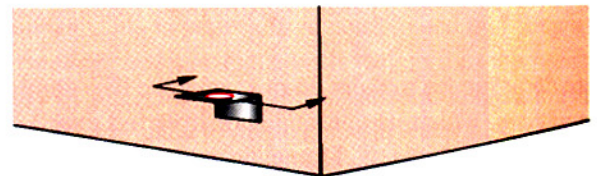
Hinges may have bearing surfaces to make the door opening easier.
